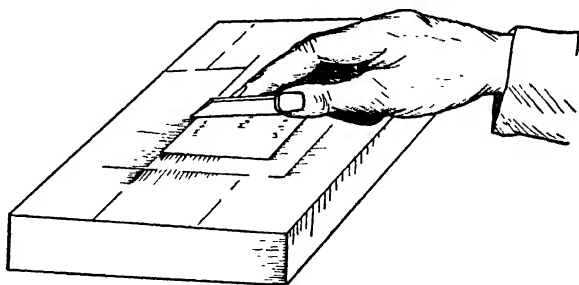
Using a card to protect previous cuts against heel of the tool.
